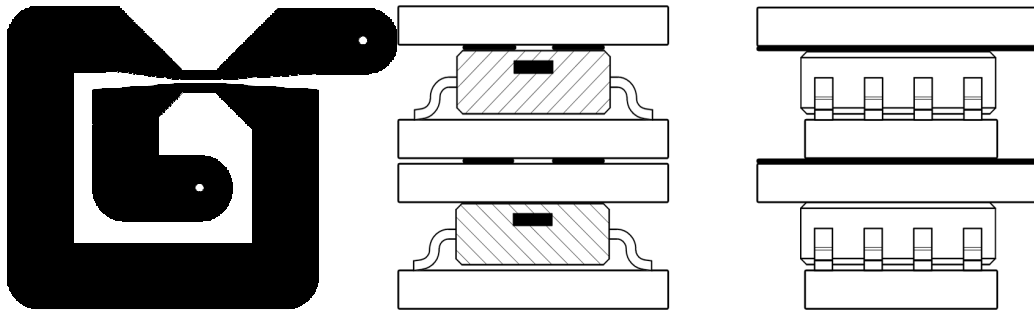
PCB trace design and assembled sensors. Top sensor is placed inside two mirrored PCBs and gets two strong contributions from the traces of both the PCBs. Bottom sensor gets only the strong contribution of the traces of the bottom PCB.
